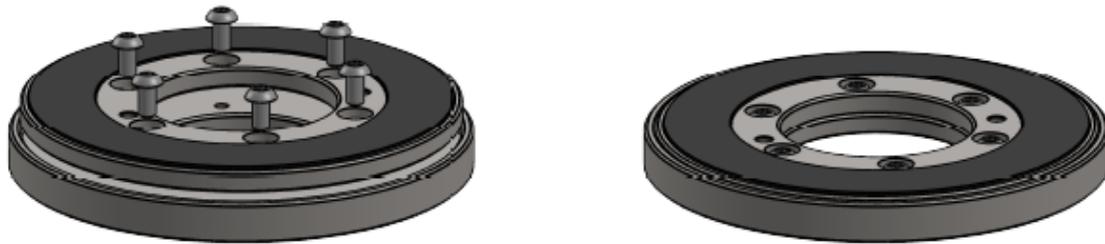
Rotor (GAR) mounting using OD sliding fit
